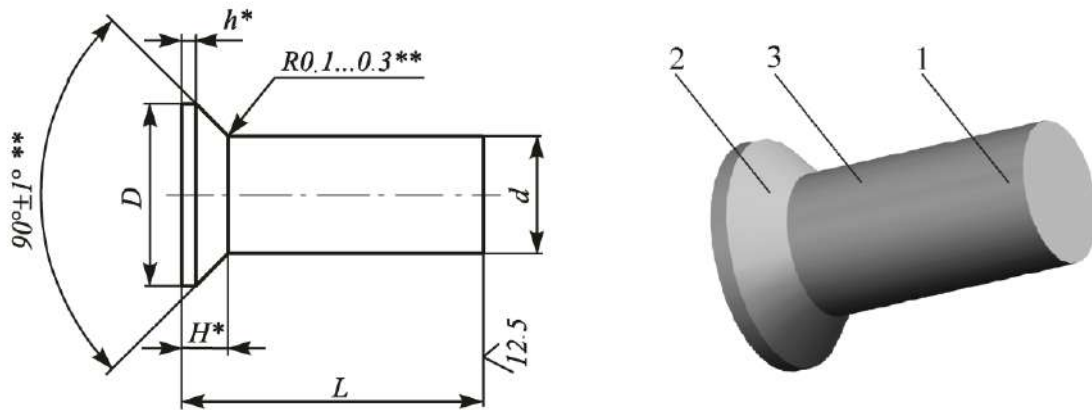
Countersunk rivet with cylindrical compensator by OCT 1 34055-92
